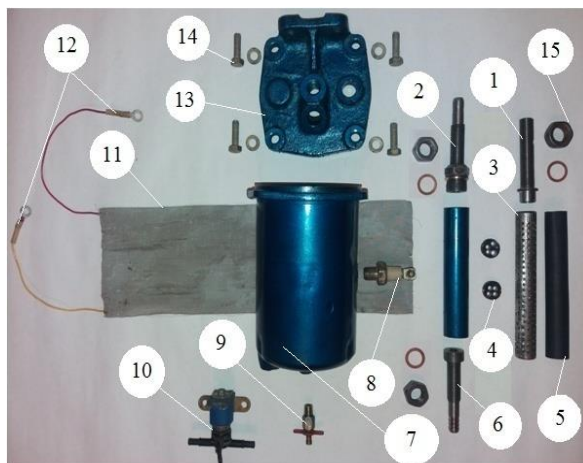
Components of a temperature stimulator: 1-hole pipe fitting; 2,6-upper and lower nozzles; 3-hole pipe; 4-heater plate; 5- filter (pampers); 7- corps; 8- mixed temperature sensor; 9-spout; 10- heating fluid control valve; 11-electric heater; 12-heater connectors; 13-cover; 14 - sealing bolts.
